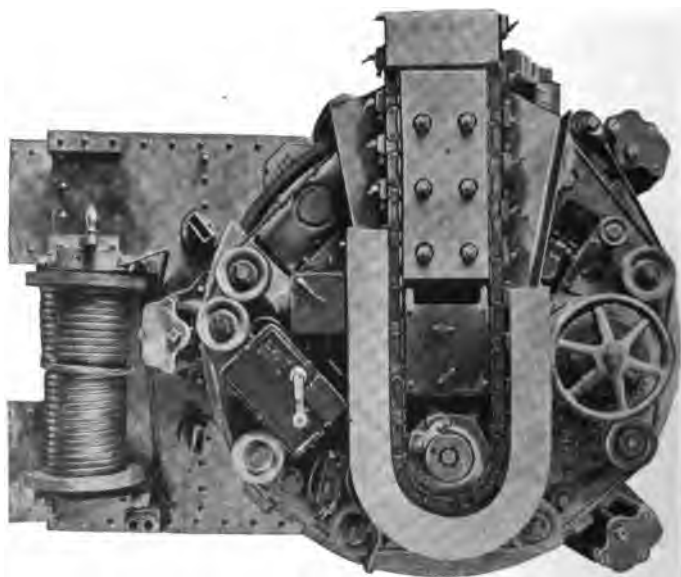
TOP VIEW OF ABOVE MACHINE.
